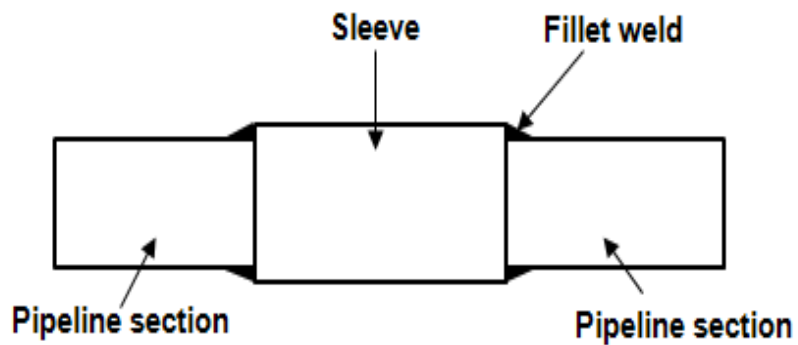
Schematic illustration of pipeline sleeve repair with fillet welds
